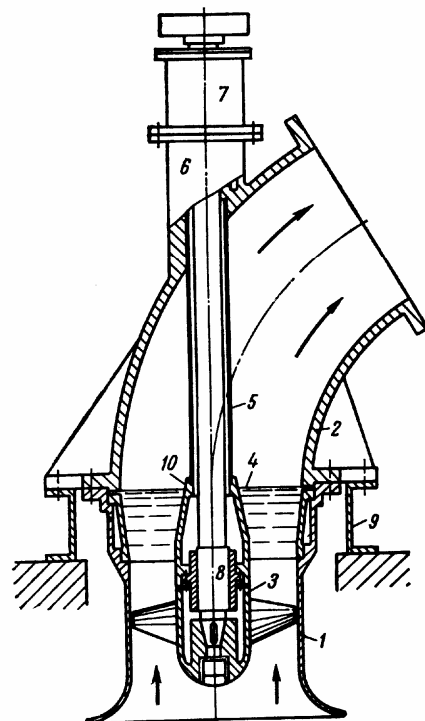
Single-stage vertical-shaft axial-flow pump
